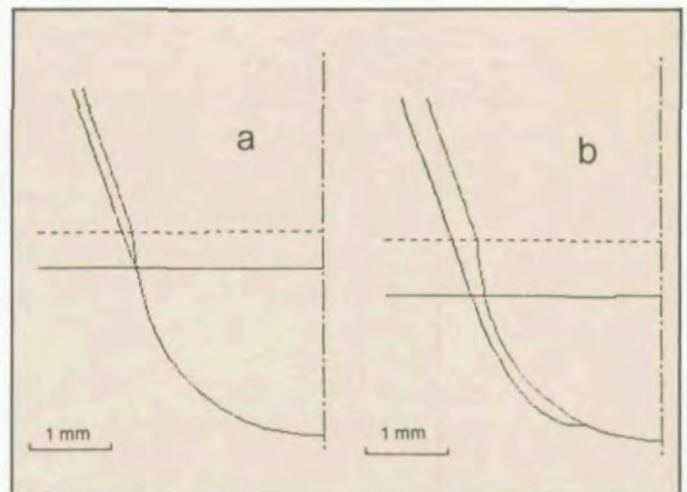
24° grinding of a gear similar to Fig. 5: (a) undeformed; (b) badly deformed after heat treatment.
